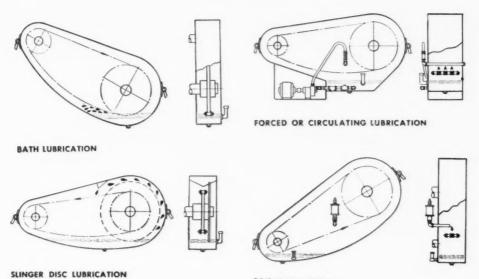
Details of a Chain Belt arrangement for force feed lubrication of a roller chain.
